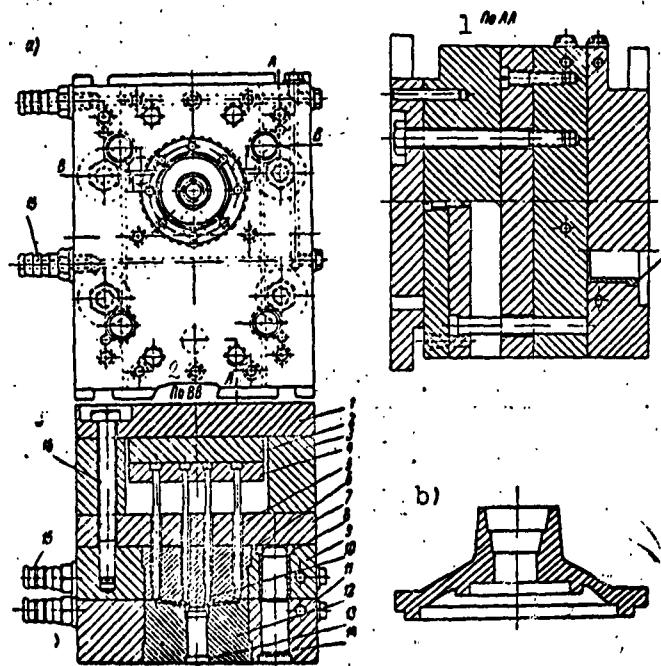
Mold for pressure casting of gyro-motor cover (a). Cast cover (b). 1) Section through AA; 2) section through BB.
